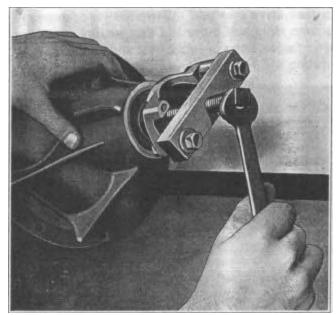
Removing Pinion Shaft Companion Flange— J-456 Companion Flange Puller
